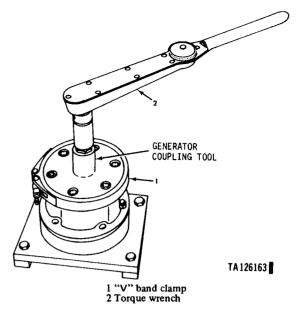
Checking generator drive gearshaft for slippage and rotational deflection.
